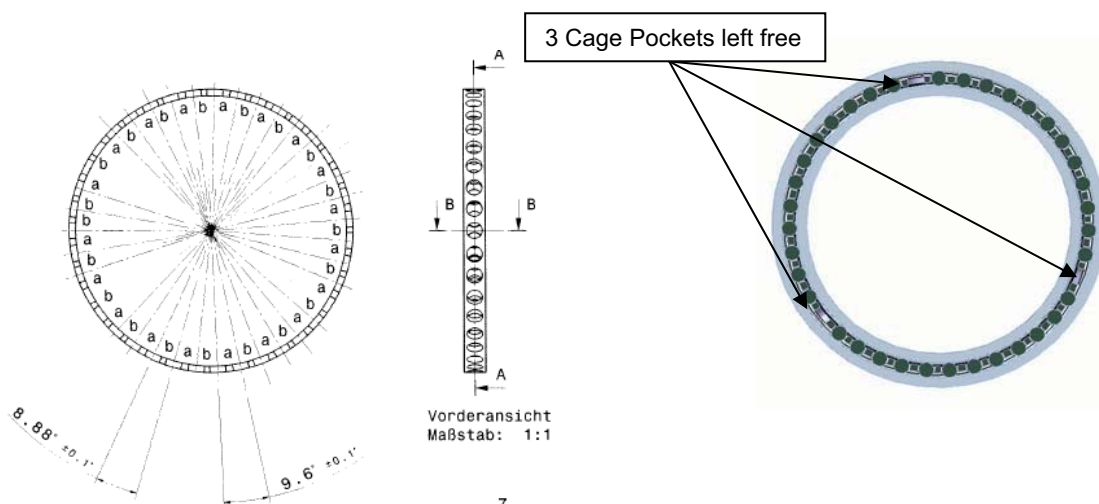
Bearing cage configuration and final bearing configuration using 36 balls only
